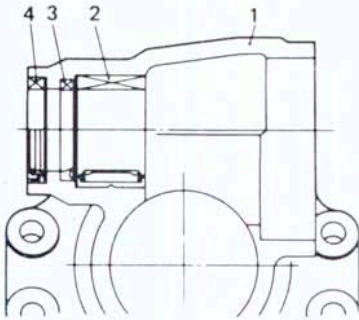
Open side of sector shaft "U" packing (3) should face inward and open side of seal (4) should face outward.
